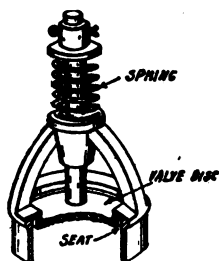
AUTOMATIC INLET VALVE IN CAGE.
